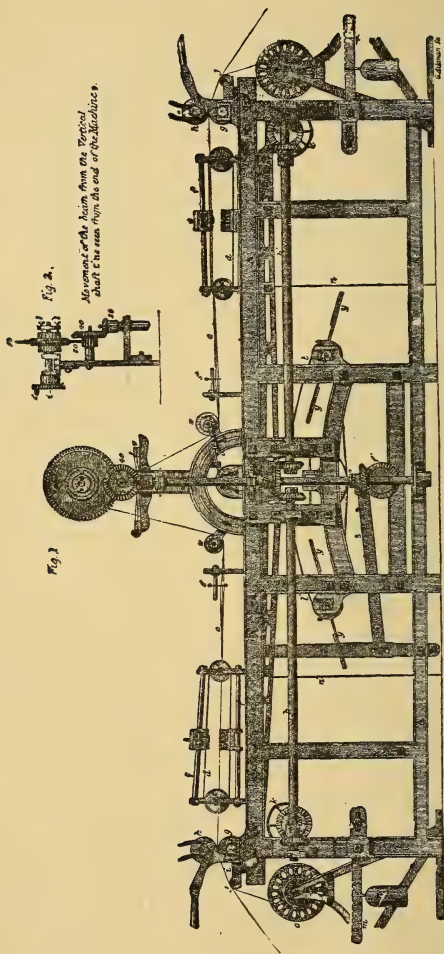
JOHNSON'S WARP-DRESSING MACHINE, IMPROVED.
